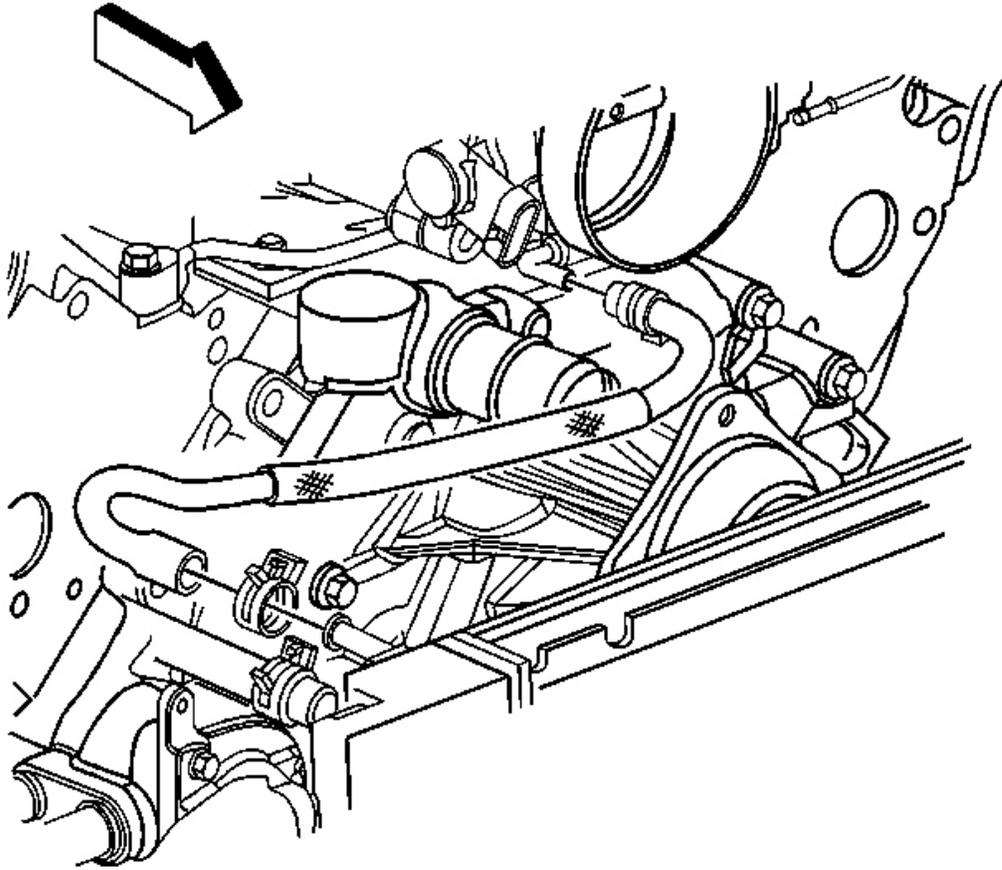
Radiator Throttle Body Heater Outlet Hose
